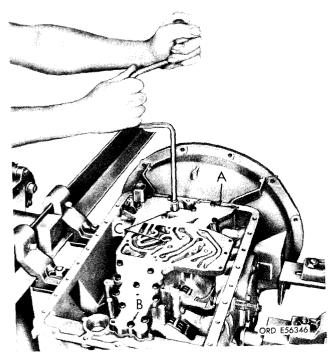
(Step 46). Install transfer plate assembly (A). Install seventeen  $\frac{1}{4}$ -20 x 1  $\frac{1}{8}$ -inch bolts and lockwashers (B). Install two  $\frac{1}{4}$ -20 x  $\frac{3}{4}$ inch bolts and lockwashers in holes at (C). Tighten bolts to 6 to 8
